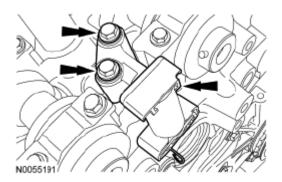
Identifying RH Camshafts Neutral Position Courtesy of FORD MOTOR CO.
